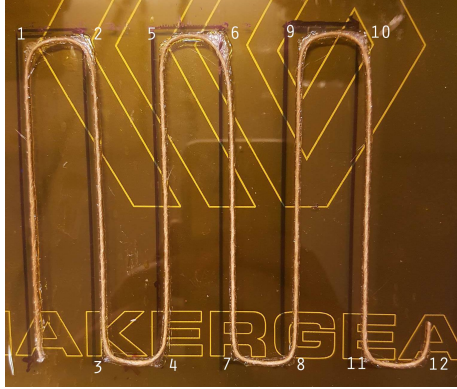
Pause test where corner 1-4 (from left to right) is printed without pausing, corner 5-8 is printed using pauses of 1 second in each corner, and corner 9-12 is printed with pauses of 2 seconds in each corner.
